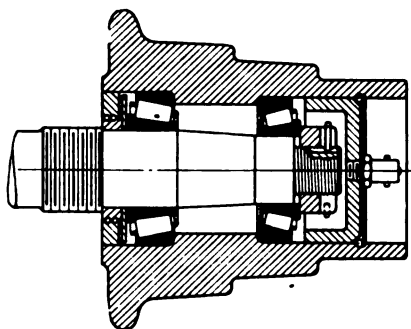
TYPICAL BEARING MOUNTING FOR PALLET WHEELS OF SLAG CONVEYORS
